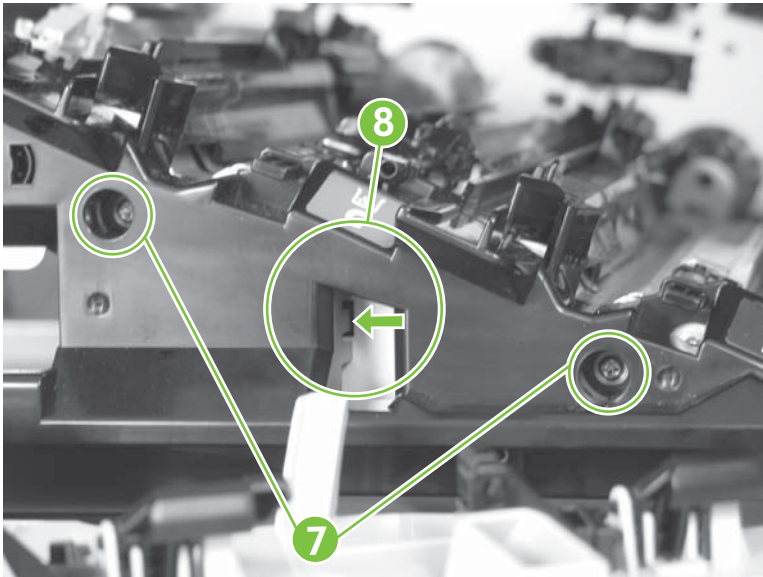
Remove the laser/scanner assembly (C/Bk) (4 of 7)
